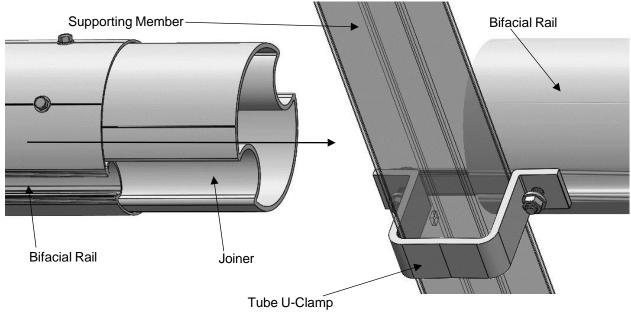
Rail/Joiner and Tube U-Clamp Assembly
